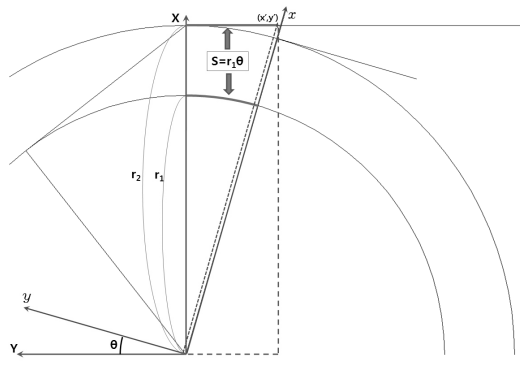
Cycloid tooth profile design of pin-pinion gear.
